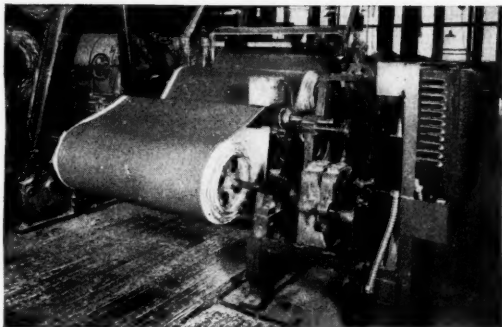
Insulating Tape Slitter Equipped with Photo-Electric Side Register Control and Constant Tension
